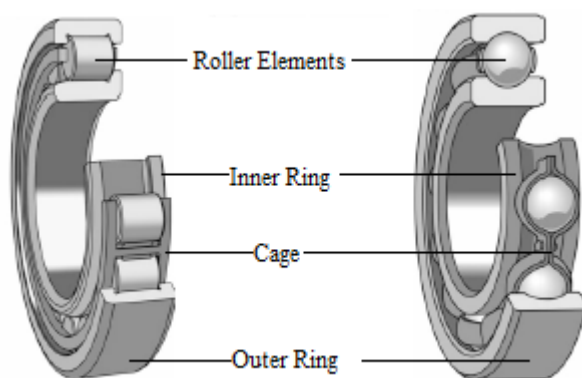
Roller bearing structure. a)Cylindrical roller bearing b)Ball bearing
